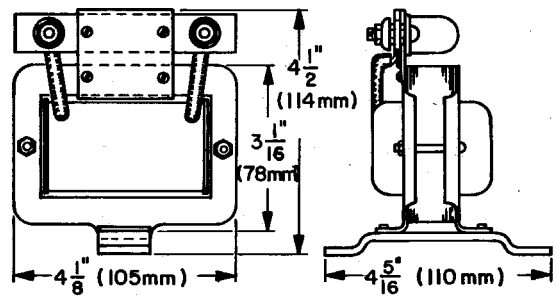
Dimensions of tripping reactor Model No. 12XBC11A
